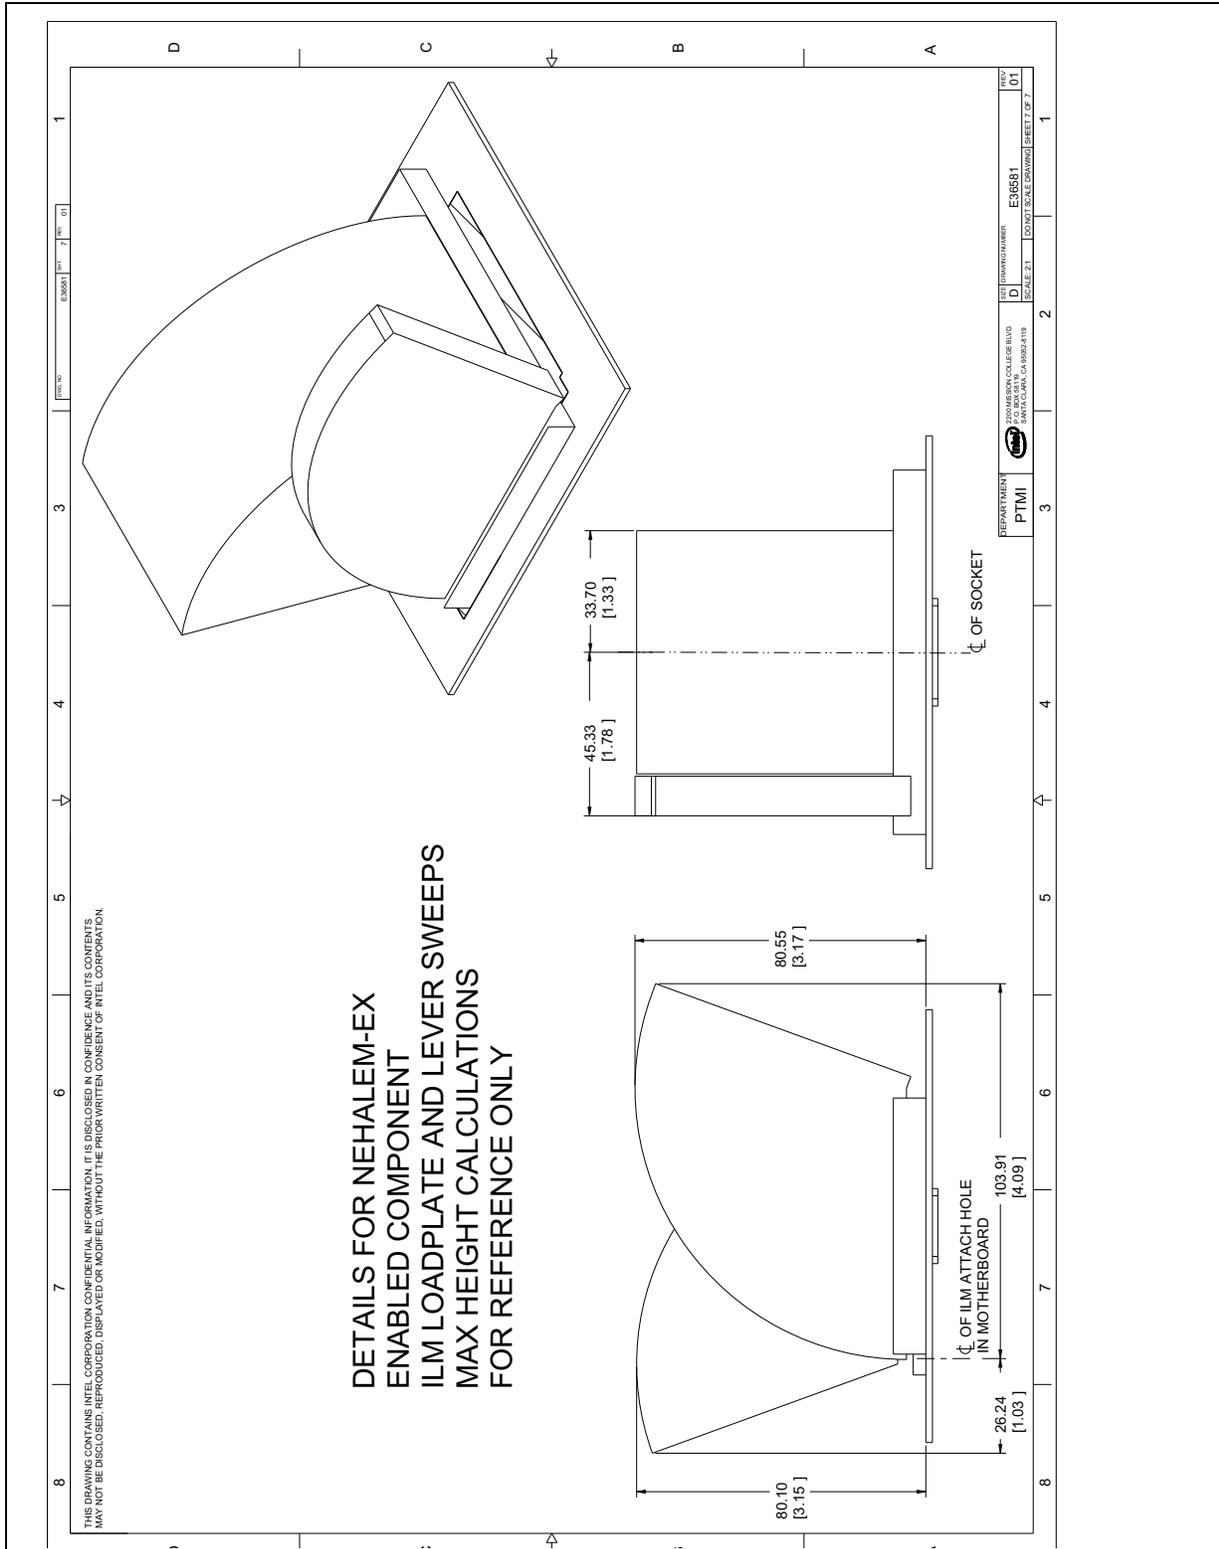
Enabled Component Board Keepout Mechanical Drawing – Sheet 7 of 7
